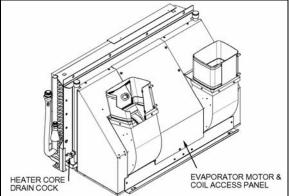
HEATER CORE INSIDE EVAPORATOR
